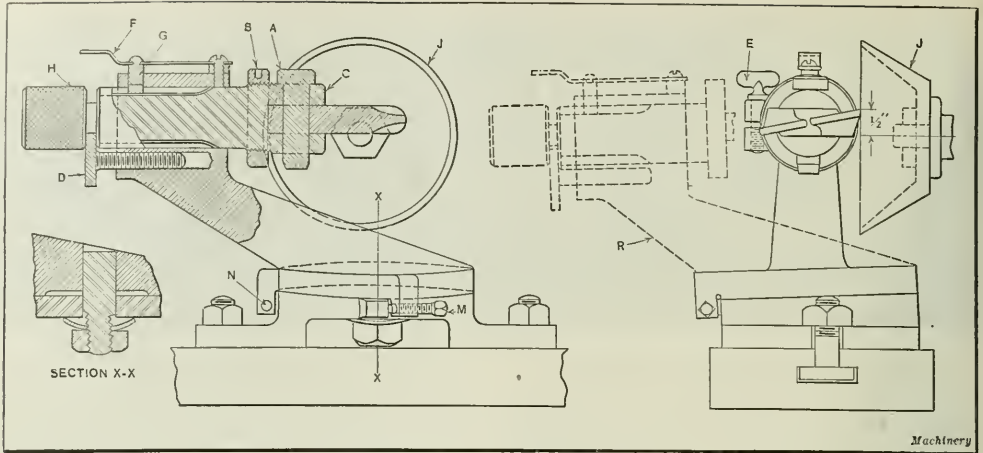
Details of Reamer-grinding Fixture, a Plan View of which is shown in Fig. 3
